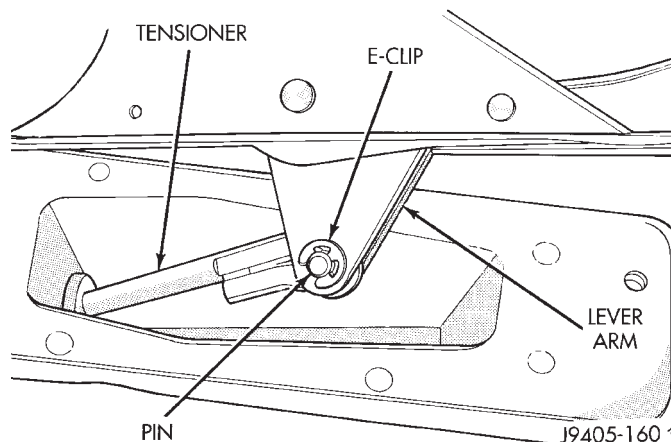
Tensioner E-Clip And Retaining Pin Location
